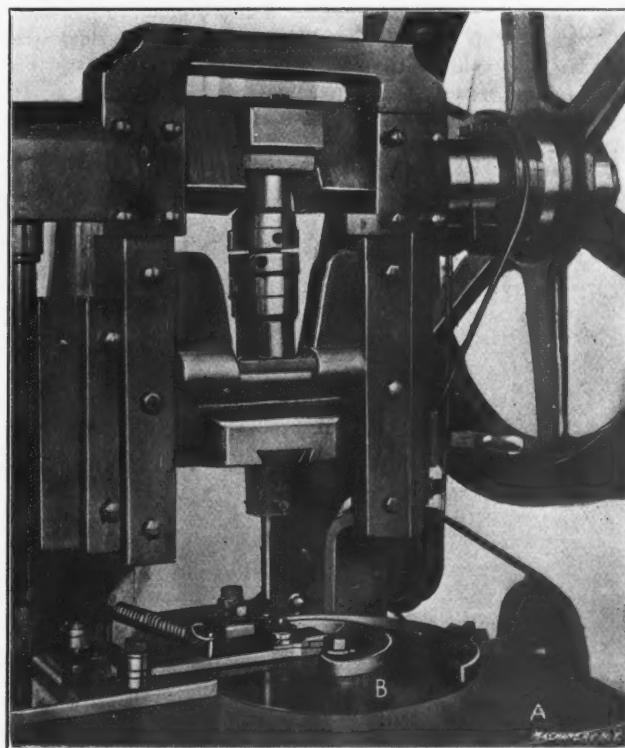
Friction-dial Drawing Press for Drawing the Cups
